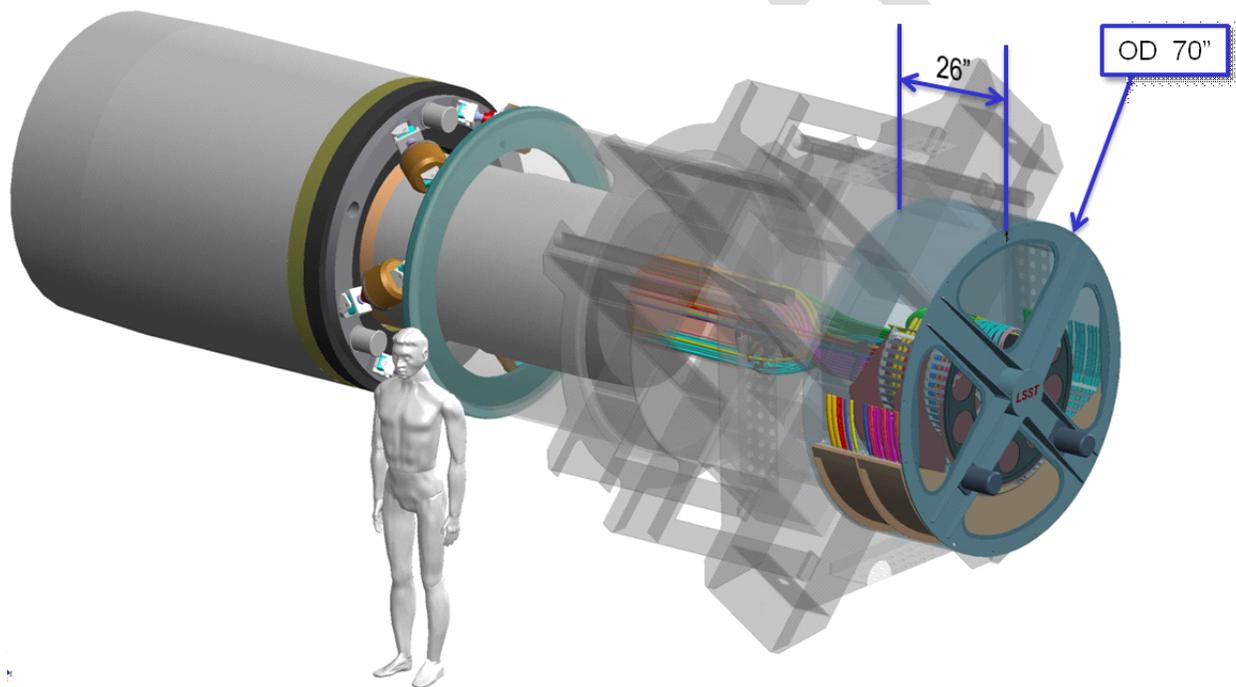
Location of Camera Cable Wrap.
